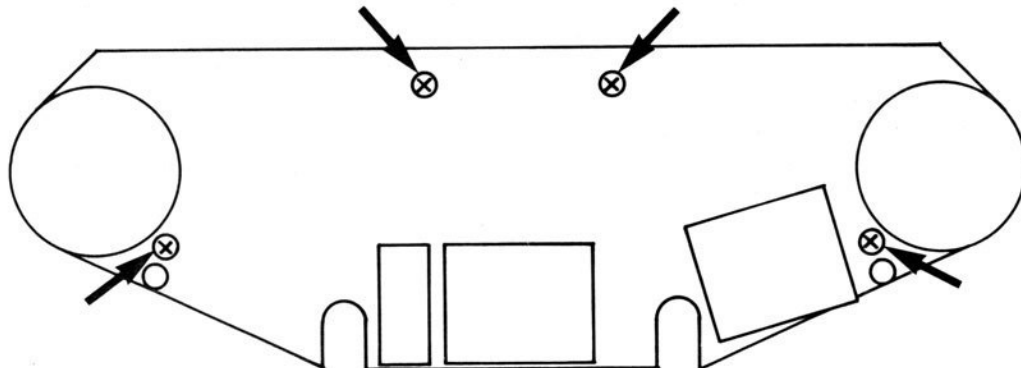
Remove these 4 screws to exchange head assemblies.
